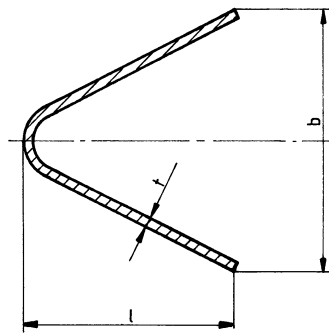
Welded sternframe propeller post
